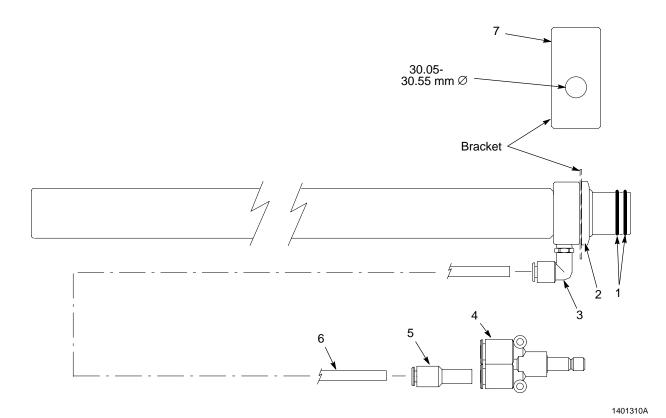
One-Piece Fluidizing Pickup Tube Kit
